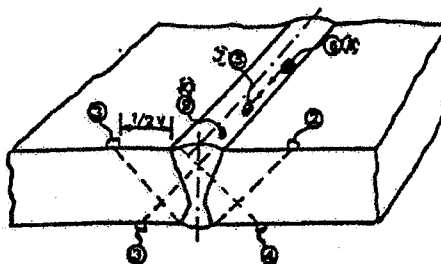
SCANNING PATHS TO BE FOLLOWED FOR WELDS OF THICKNESS GREATER THAN 85 MM.
